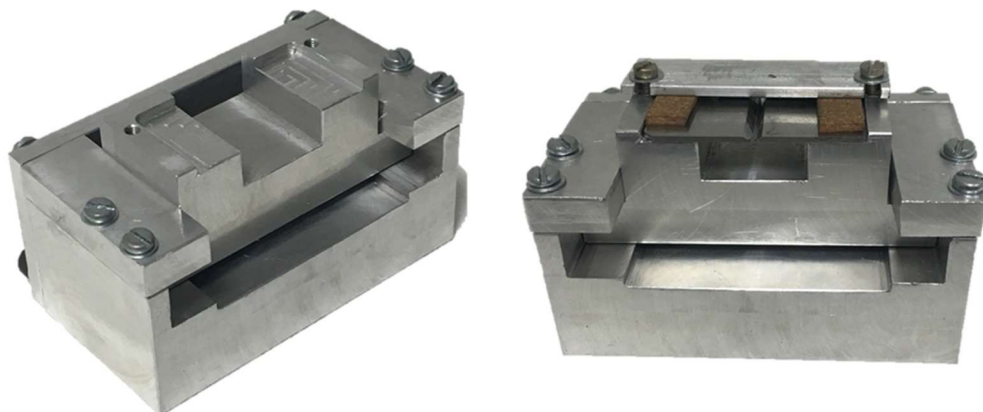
Image of final manufactured rig and rig with fixed blade.
